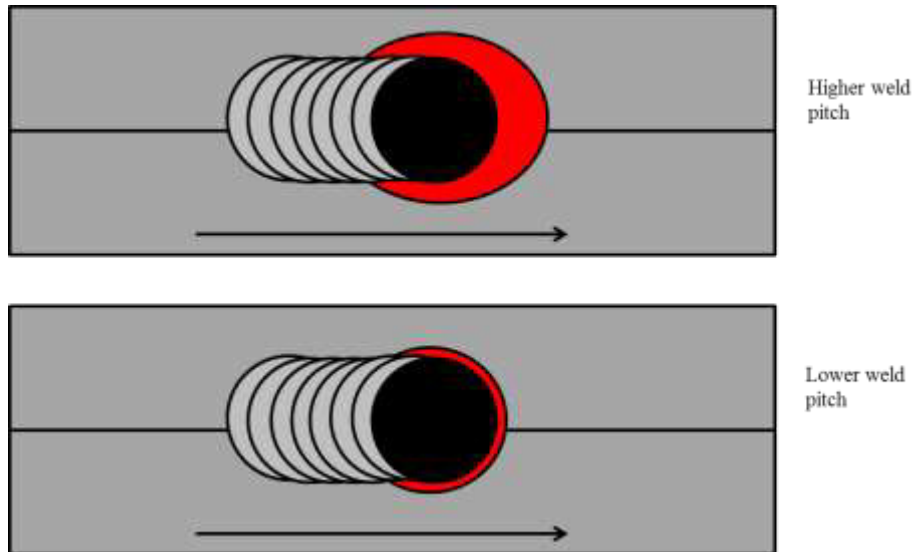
At higher weld pitch, the heat profile extends past the tool shoulder (a) while at lower weld pitch, it is possible to keep the heat profile within the tool shoulder envelop.
